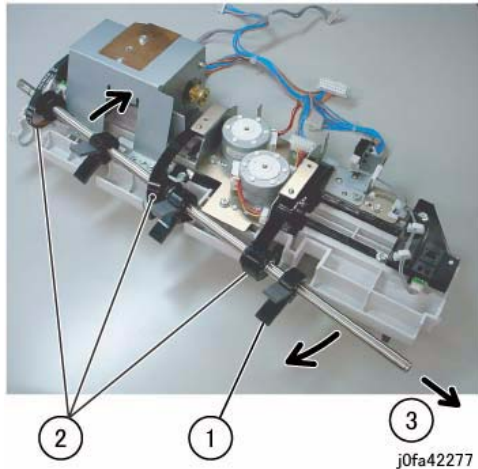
Removing the Set Clamp Shaft (j0fa42277)
